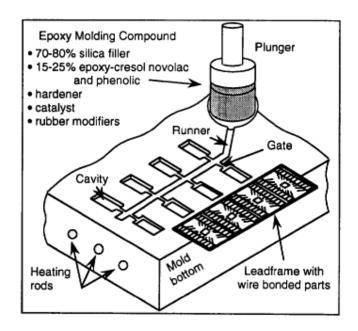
Transfer moulding process with epoxy moulding compound pellet being loaded into the pot prior to moulding (Nguyen, 1993)
